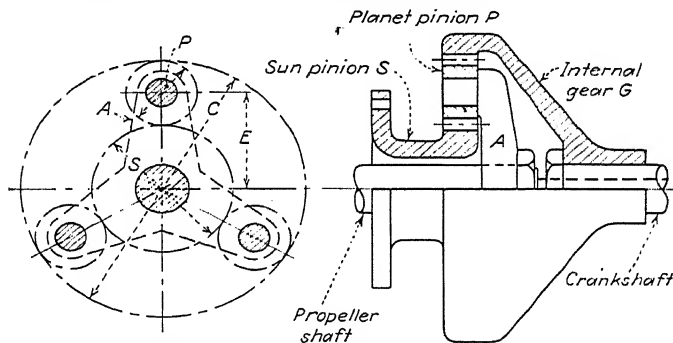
General arrangement for a three-planet pinion planetary reduction gear.
